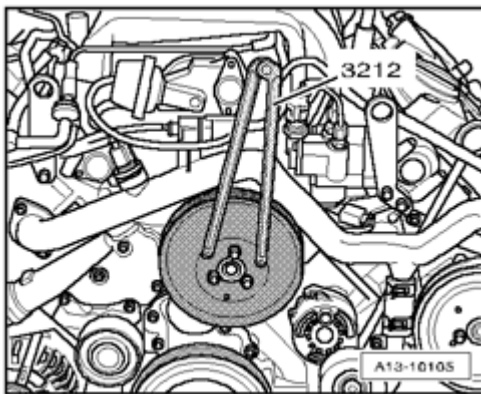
Loosening Bolts Use Spanner Wrench 3212 To Counter-Hold
